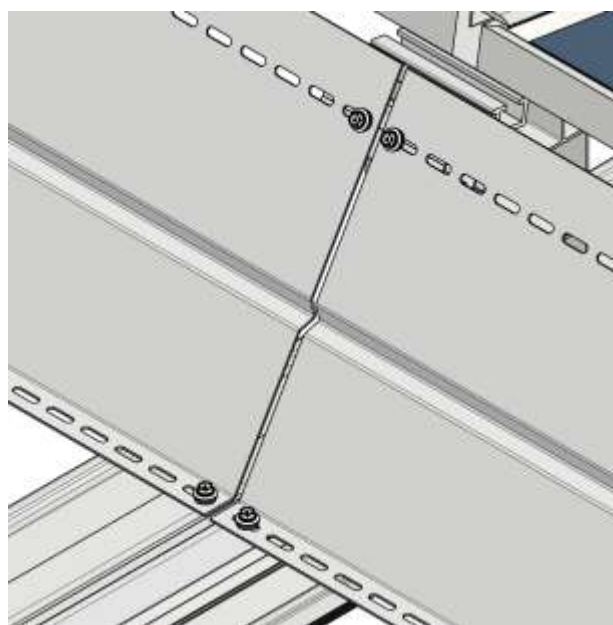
Assemble the wind plates end to end with a Self-Drilling-Screw 4.8x19 each.
